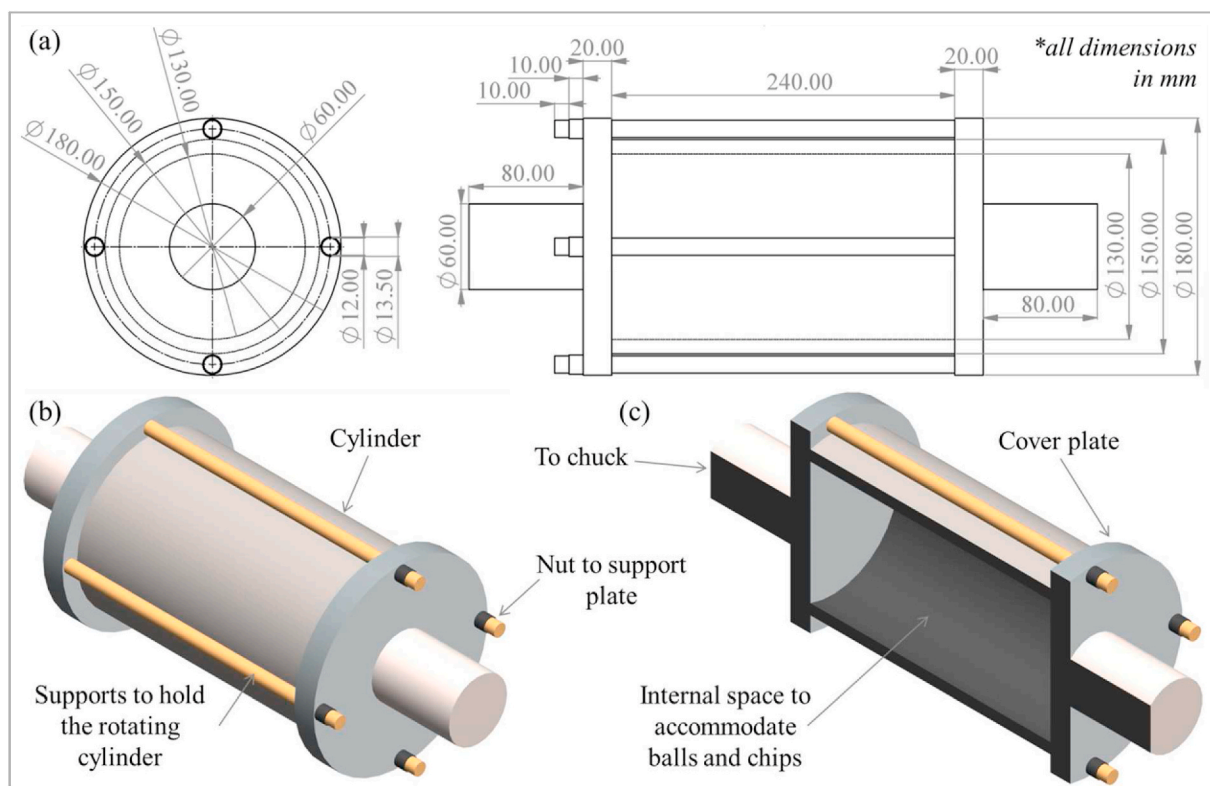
Specifications of In-house designed and fabricated tumbler ball milling apparatus.
